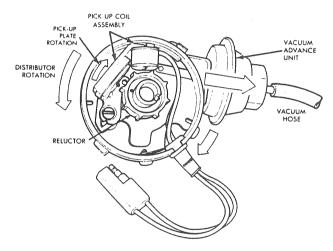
Vacuum spark advance. (Courtesy of Chrysler Motors Corp.)
